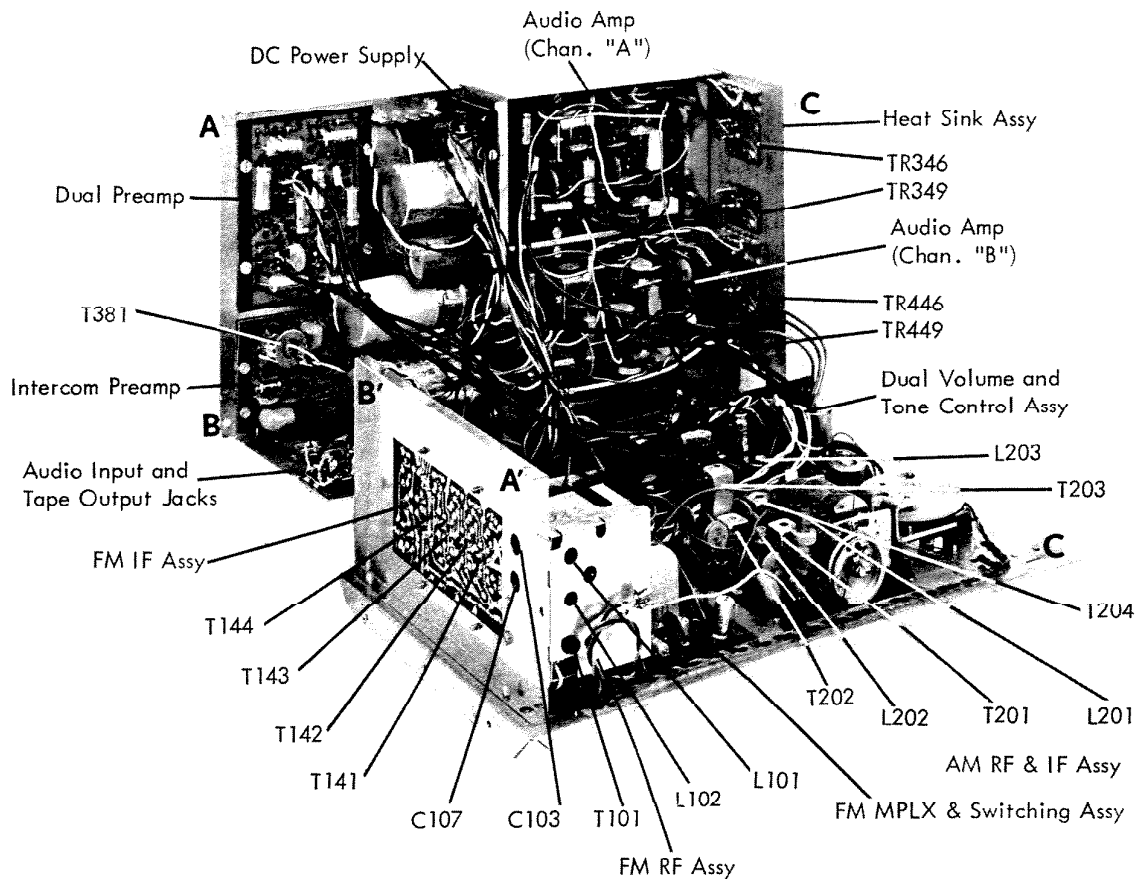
RECEIVER CHASSIS OPEN FOR SERVICING AND/OR ALIGNMENT
